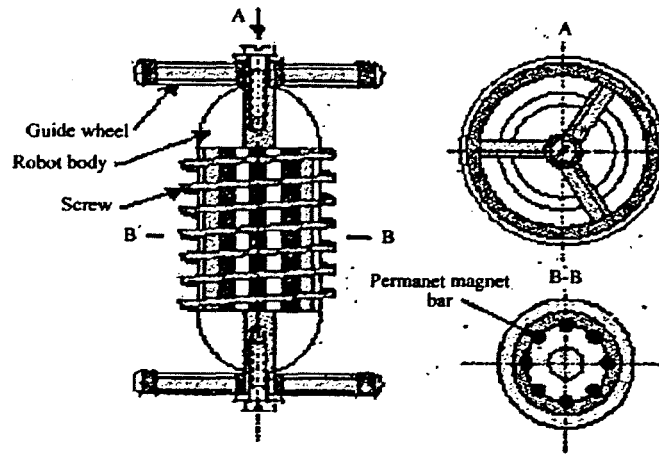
A screw type swimming microrobot with guide-wheel
